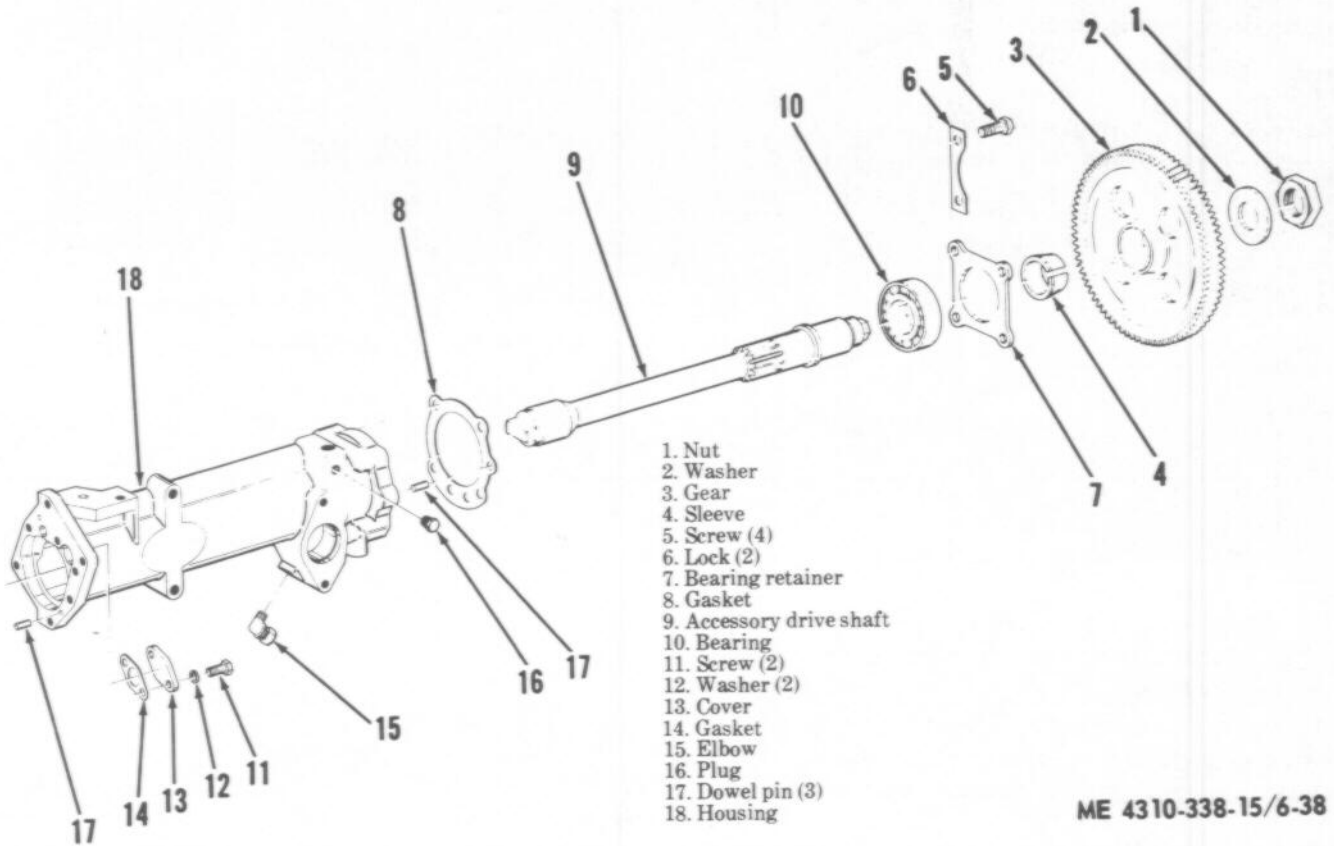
Accessory drive shaft and housing, removal and installation (sheet 1 of 2).
